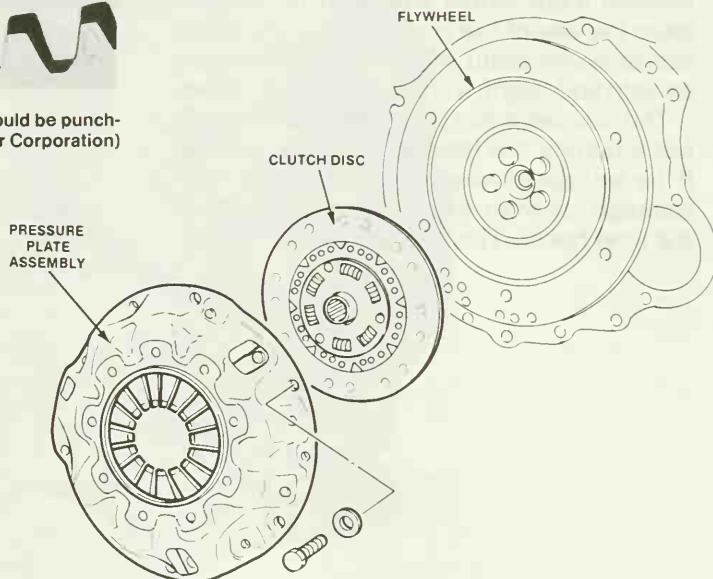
After removing the clutch cover bolts, remove the pressure plate and disc. (Nissan Motor Corporation in USA)
